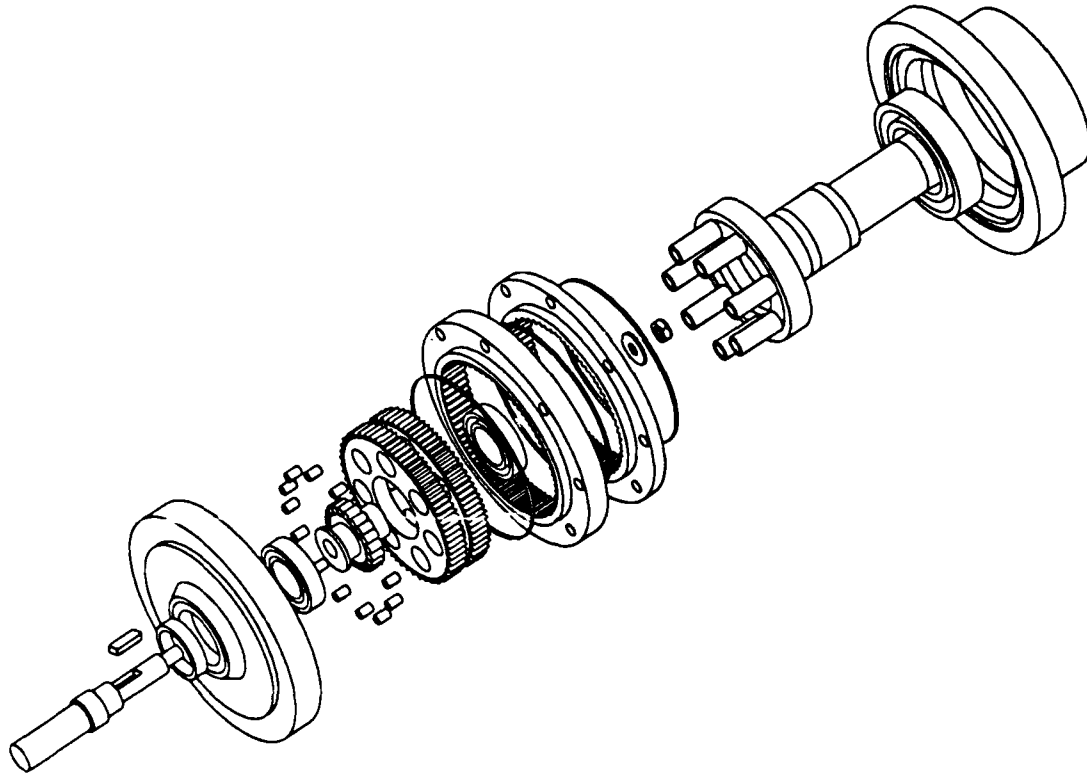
Assembly Drawing of REDEX CORBAC unit, which shows the input shaft, crown gears and eccentrically located bearings, split inner gear, and the cantilevered output shaft which takes the load from the milled holes in the crown gears.
